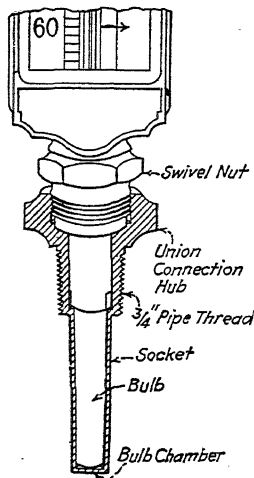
a*.—Straight thermometer with separable-socket connection.
